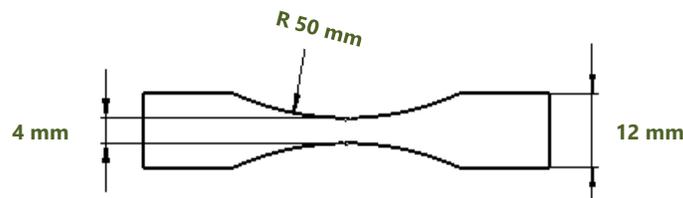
DIMENSIONS OF DOG-BONE TEST PIECES
